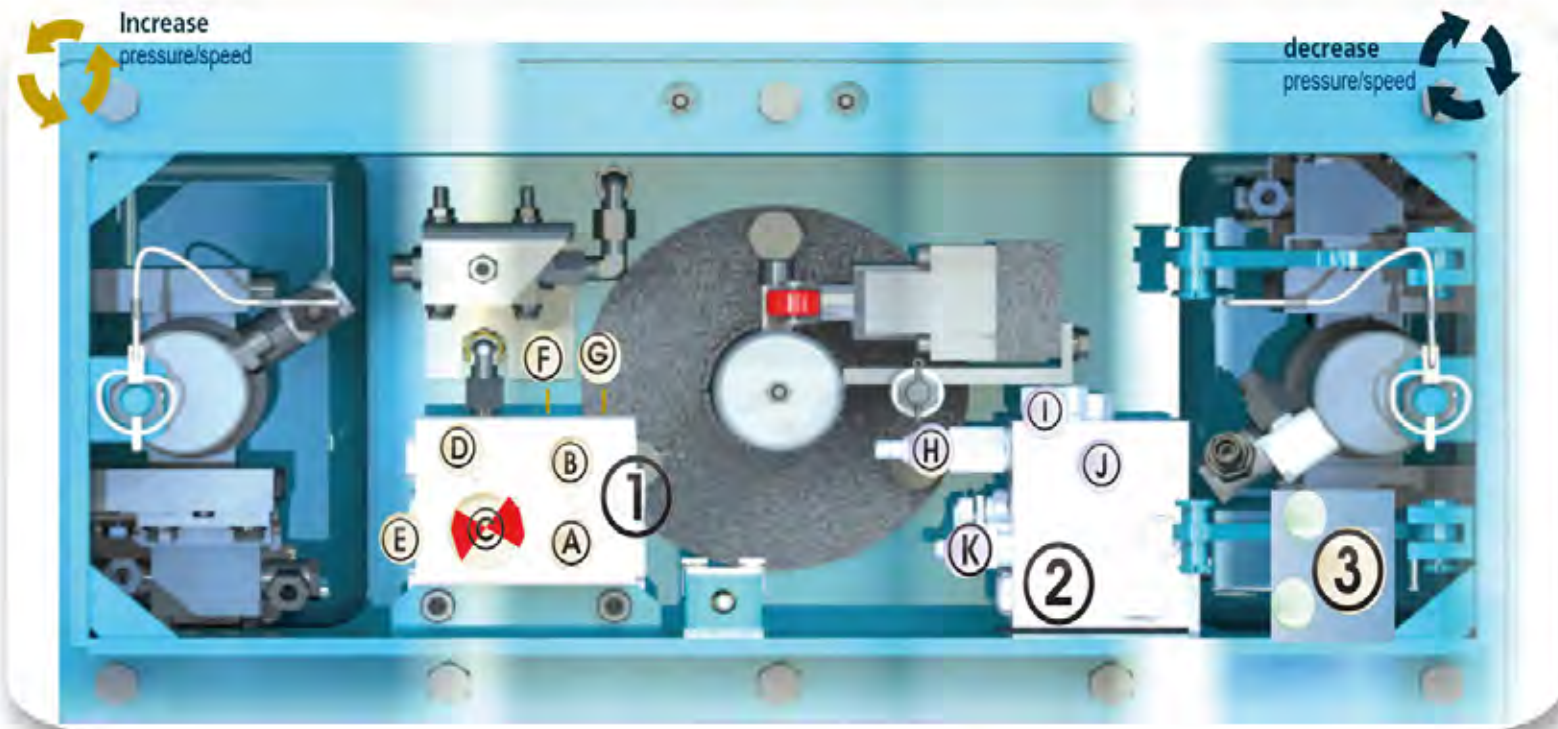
HYDRAULIC MANIFOLD P/N/P/N 645295-1
